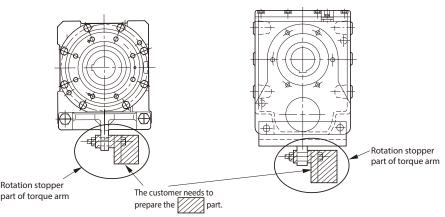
Example of Rotation Stopper (Attachment Type Torque Arm)
